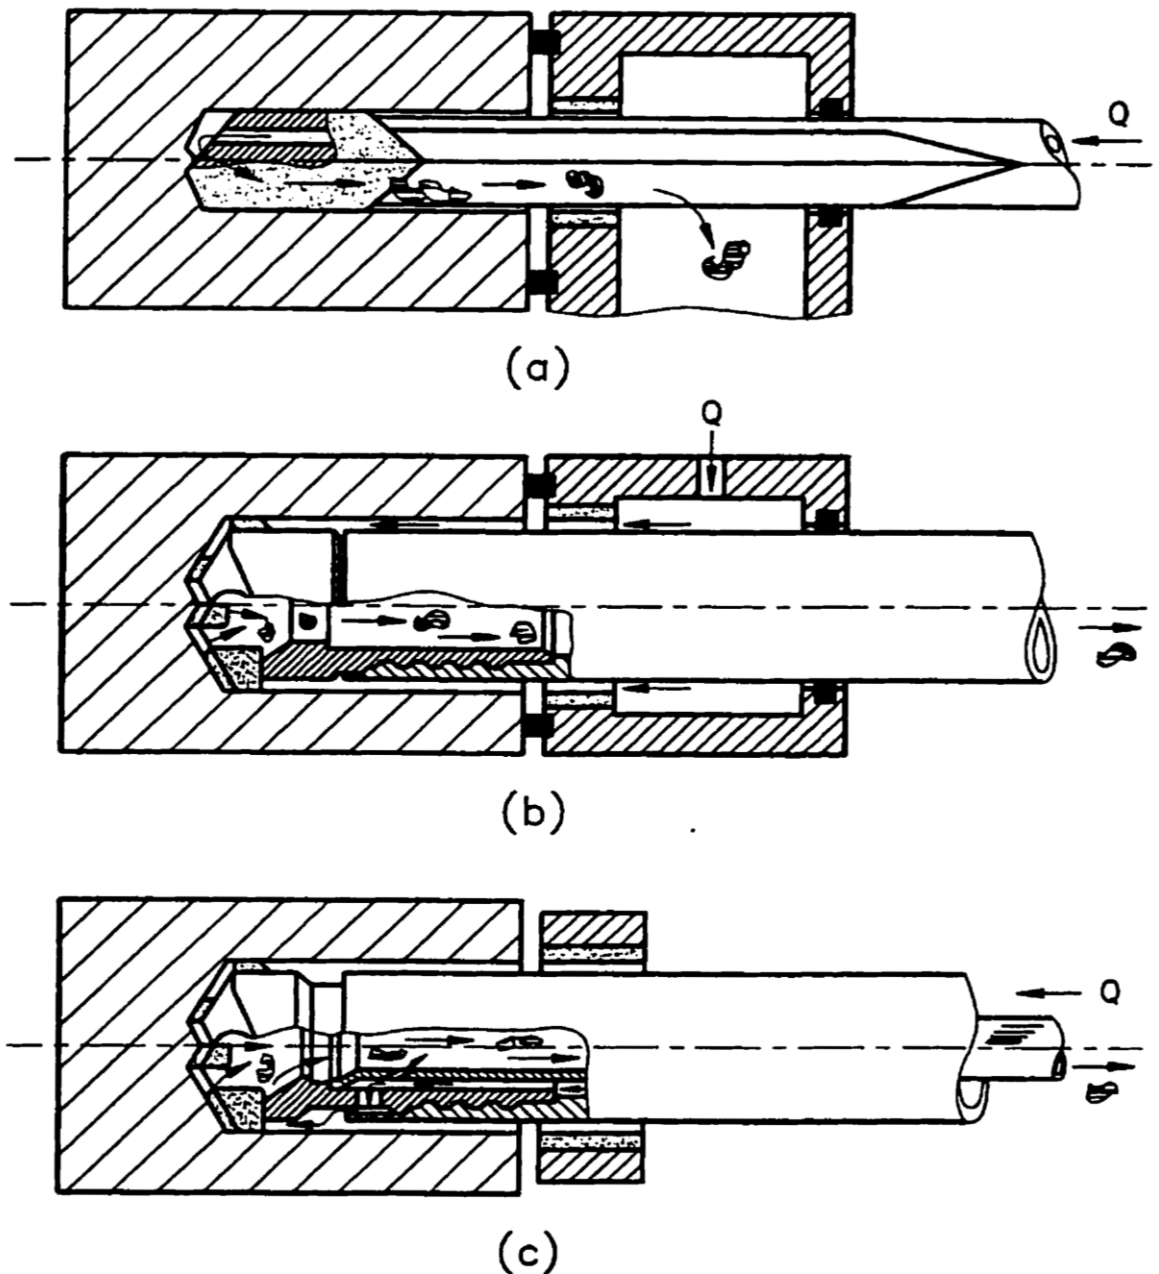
The principle of (a) Gundrilling, (b) BTA Drilling and (c) Ejector Drilling
